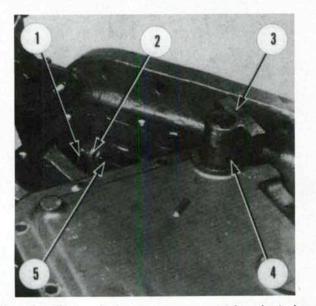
Transmission top cover must be pivoted as shown to gain access to pin (1) securing parking brake rod (5) to brake pawl (2) before cover can be removed.
